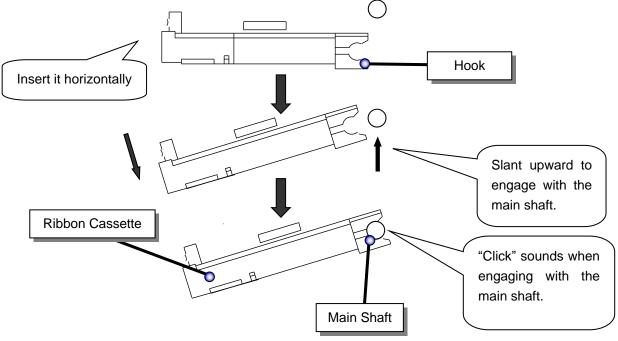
Reattaching to the Main Shaft (Ribbon Cassette Sectional View)
